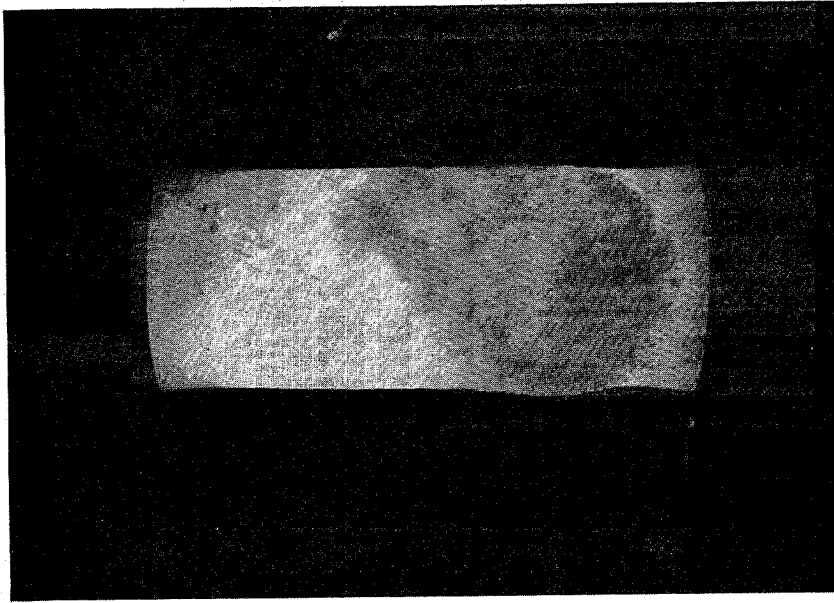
Photographic example of the fundamental crushing failure mode.
